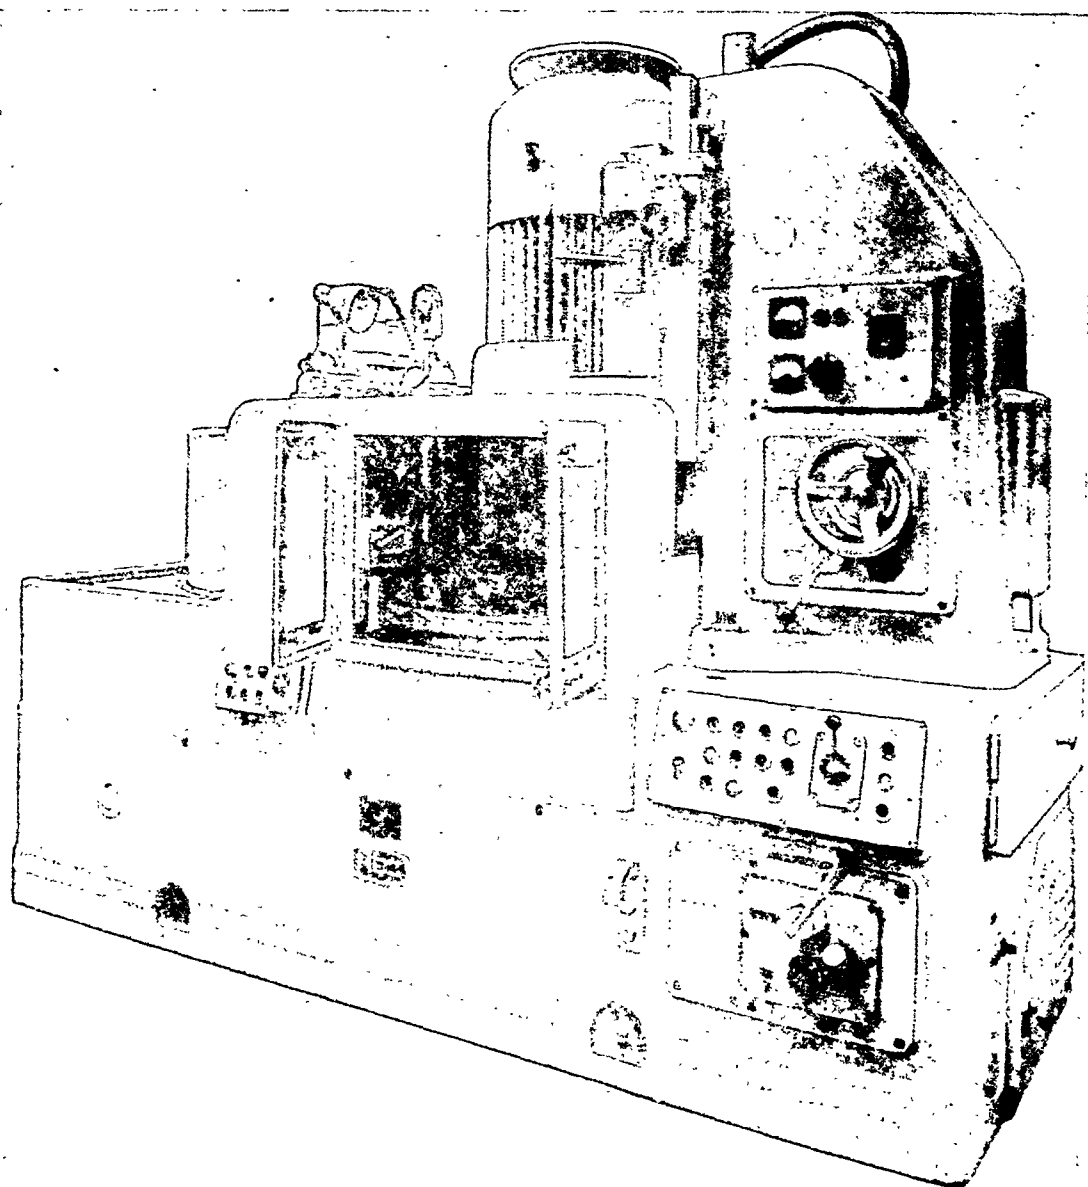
Vertical-spindle rotary-table surface grinder, model 3E756
